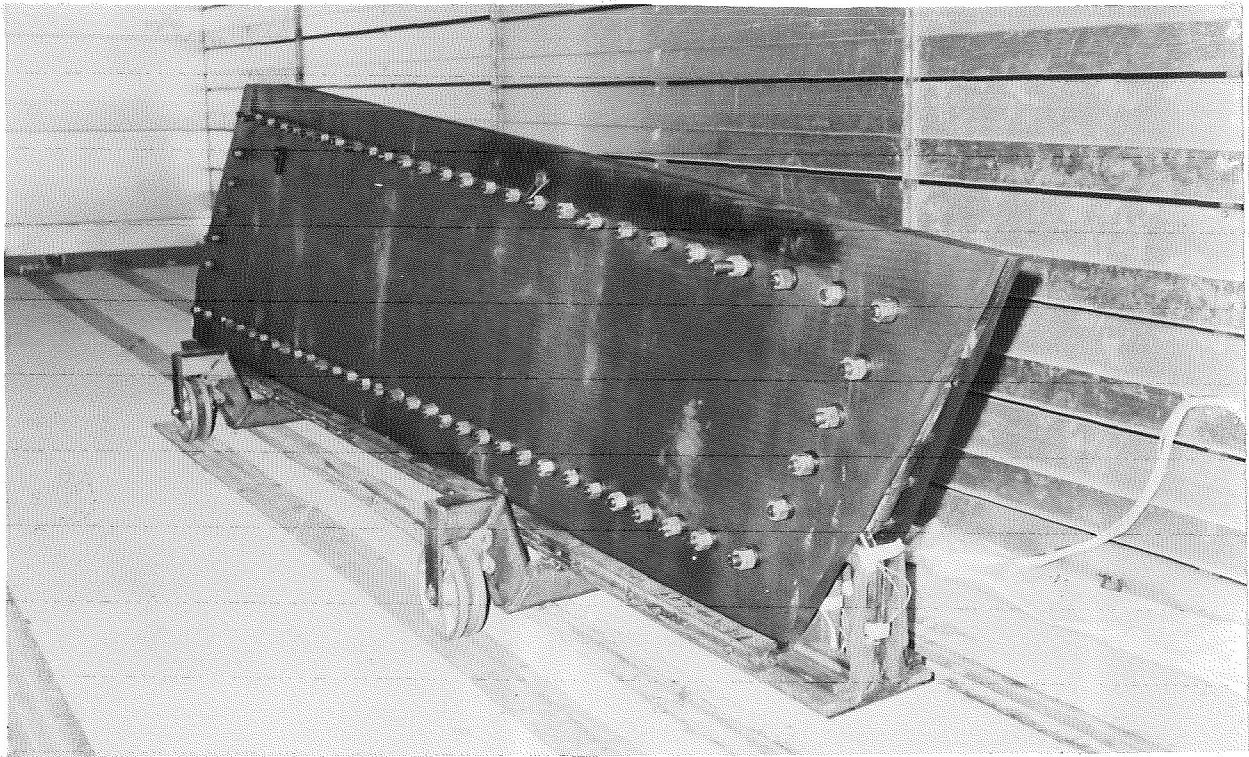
ASSEMBLED FORM MOLD DIE IN CURING OVEN
